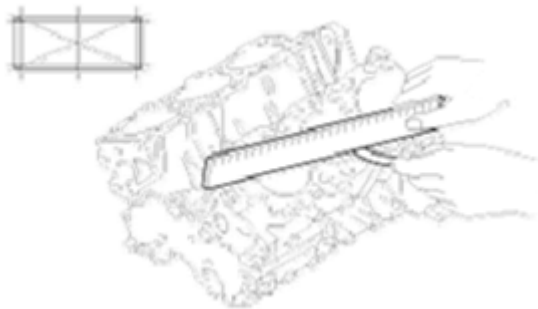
Inspecting Surface Of Cylinder Block For Flatness
